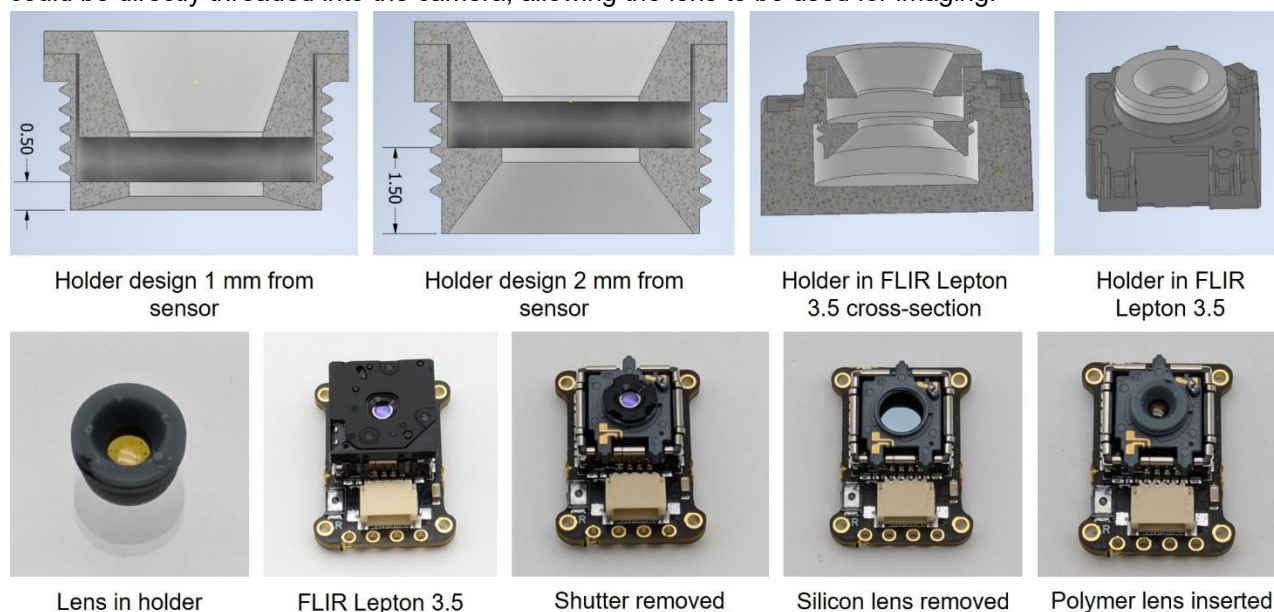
3D printed holder designs and integration into a FLIR Lepton 3.5 thermal camera module.
